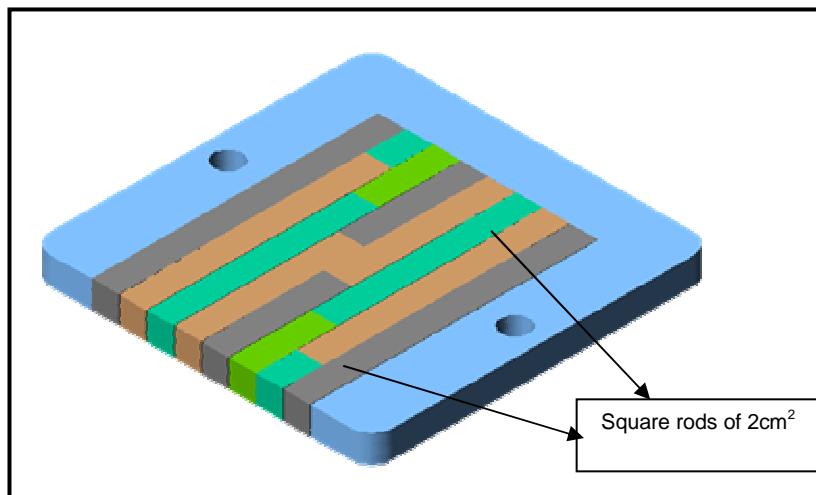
Machine drawing of Chemical Dosimeter Plate
